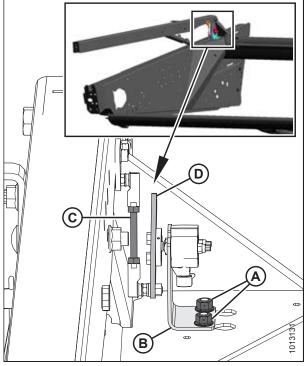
Reel Height Sensor – Right Reel Arm (Front View)
